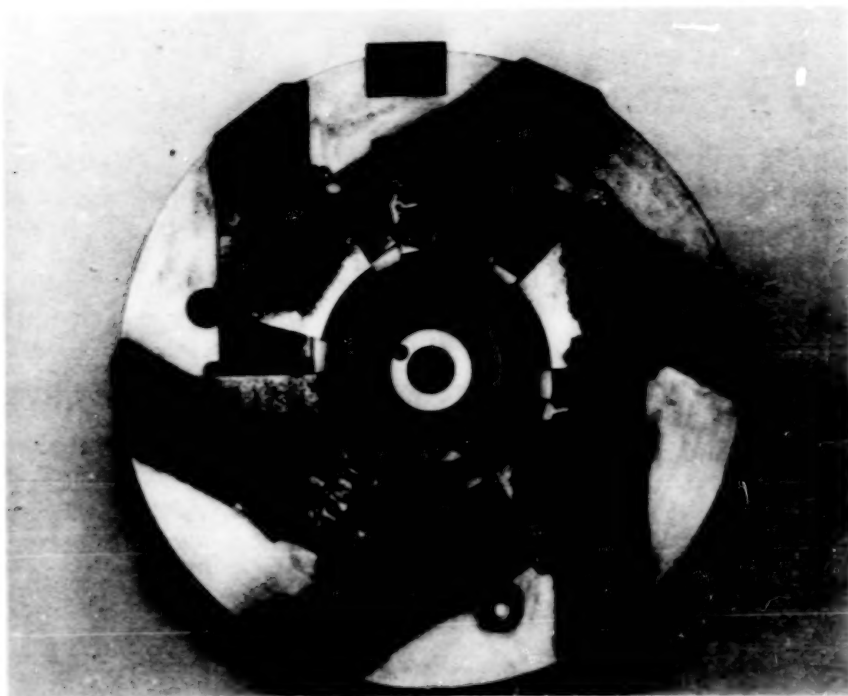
Thrust bearing after test. Second assembly, clamped bearing mount.
